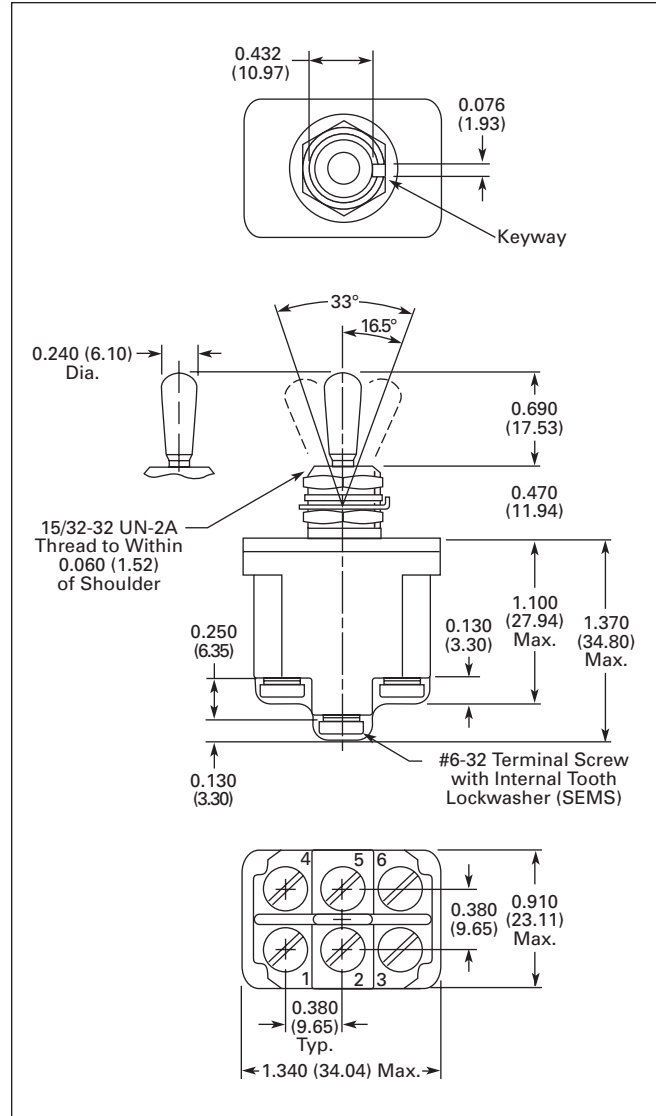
Two-Pole Molded-In Screw Terminal E10E Series — Approximate Dimensions in Inches (mm)
